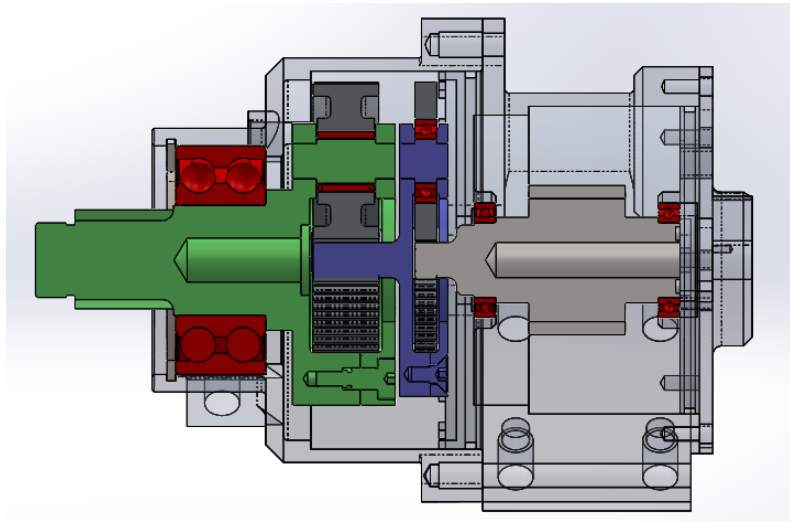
assembly section in which the positions of the support bearings (red elements) are highlighted
